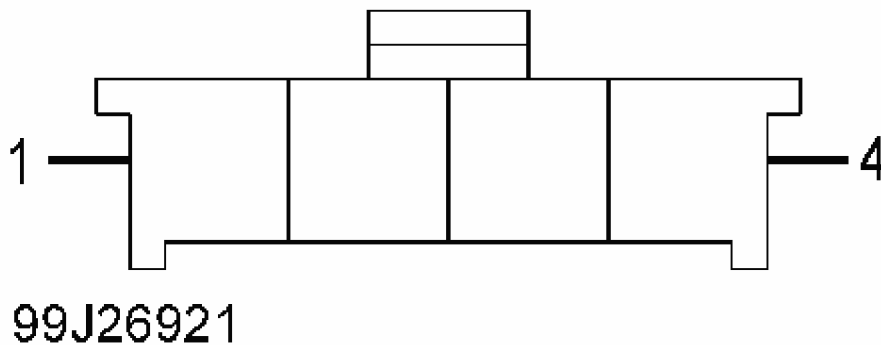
Identifying SRS Right Side Harness 4-pin Connector & Right Front Seat Harness 4-pin Connector Terminals
